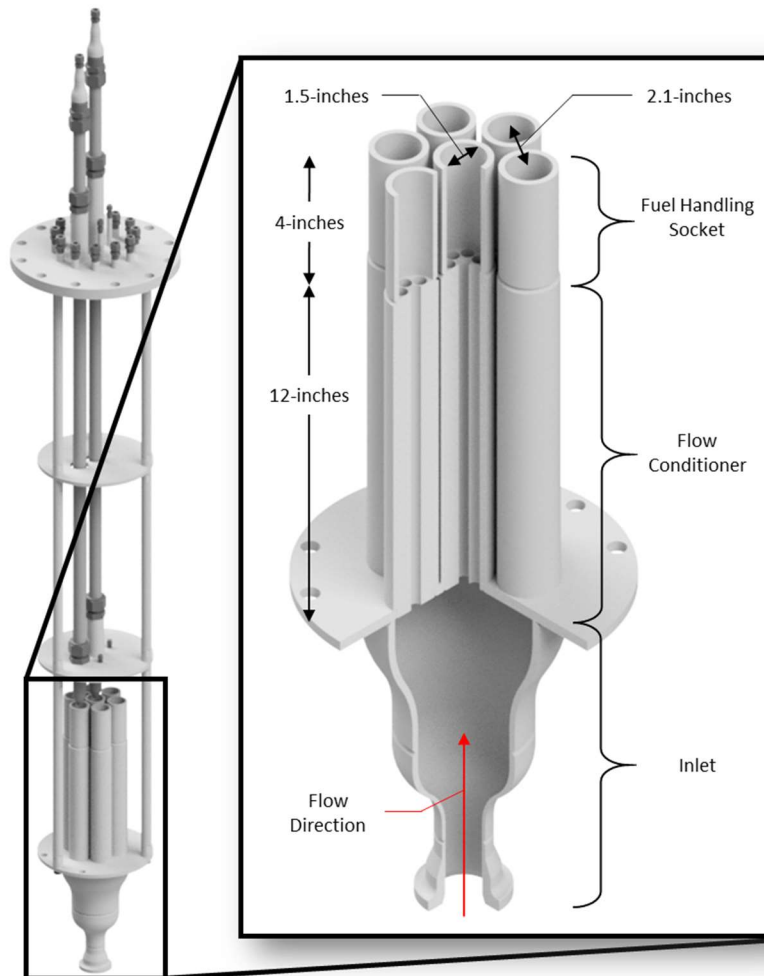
Detailed isometric view of the Full-Scaled Test Section which includes a Grayloc connector, inlet header, flow condition, fuel handling socket, and base-plate. Dimensions of the sockets denoted here and listed in Table 1 were calculated from a “Pseudo-Scaling” analysis which preserves the exit velocity.
